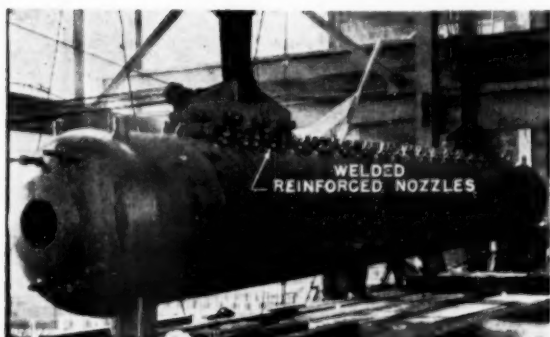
KEARNY DRUM SHOWING WELDED REINFORCED NOZZLES
